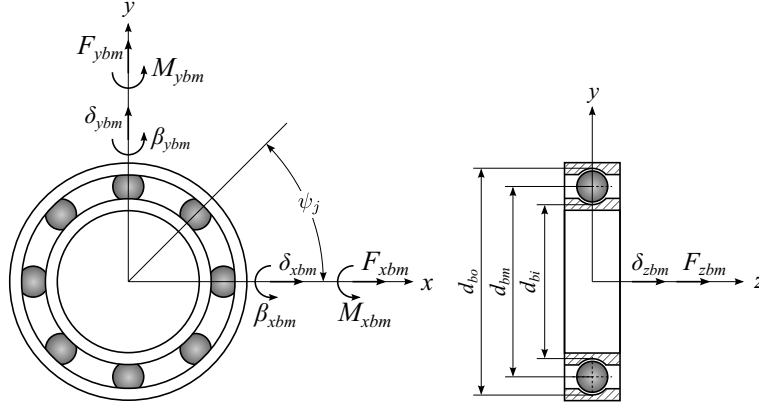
Deep-groove ball bearing with dimensions, mean loads and mean displacements.
